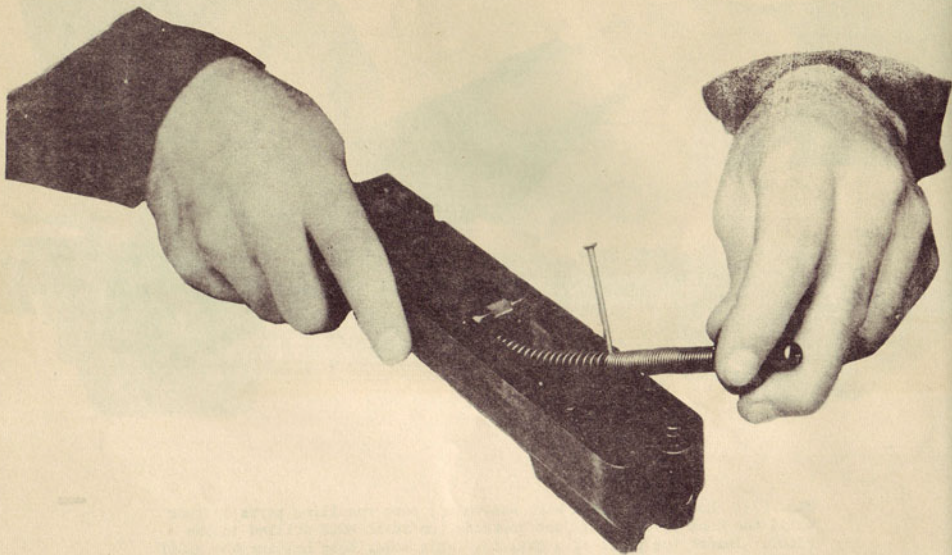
Move recoiling parts fully forward and lift out PILOT RECOIL SPRING and BUFFER.
